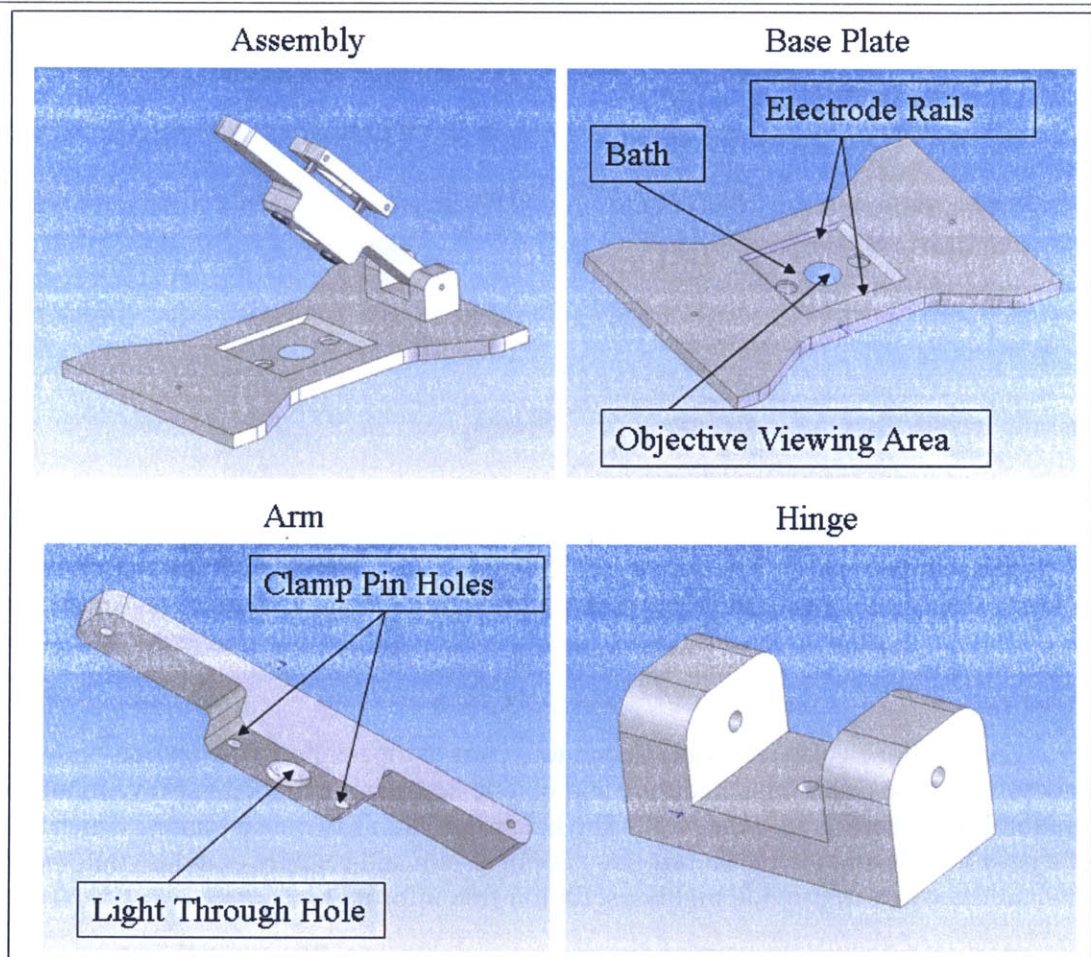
Solid Model Drawings of the Stimulation Chamber Assembly
